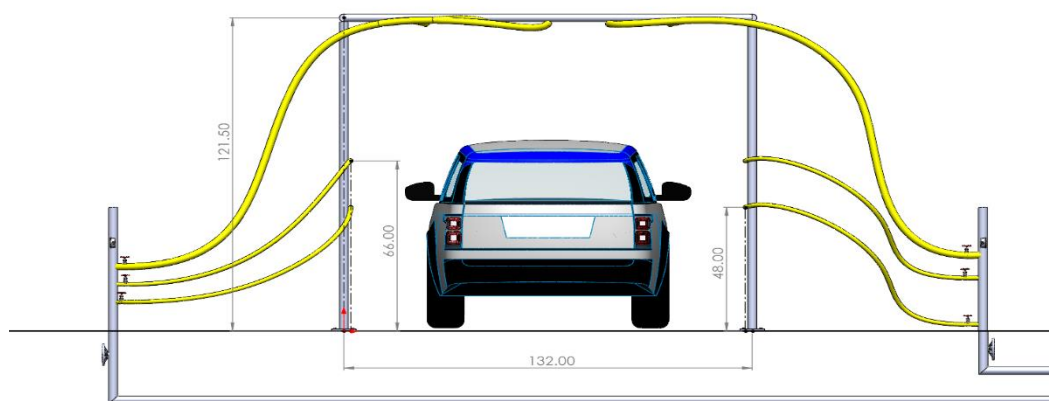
Front view of the existing shower tester (W-132"/11ft & H-121.5"/10.1ft)
